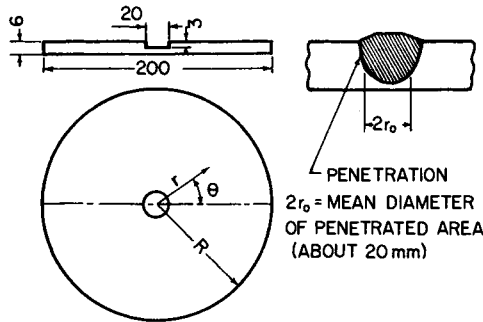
Plug-welded specimen used by Watanabe and Satoh.⁽⁶⁰⁷⁾
